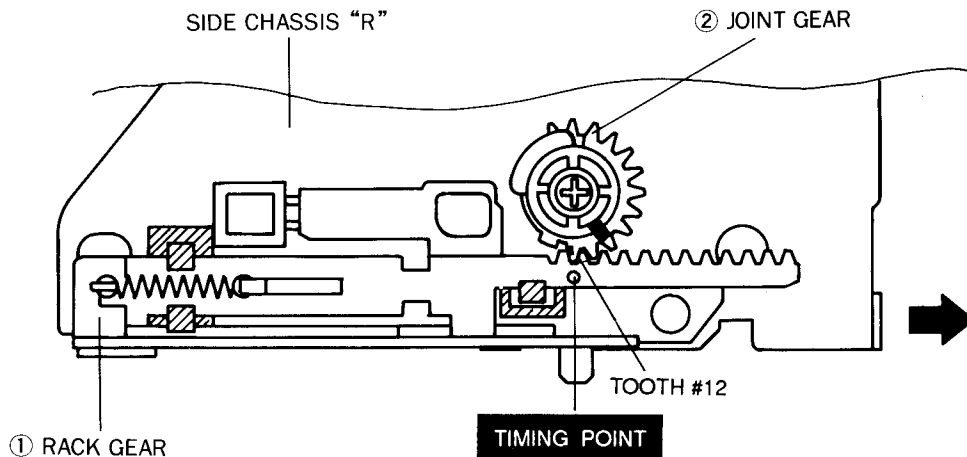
Timing Confirmation of Rack Gear and Joint Gear
